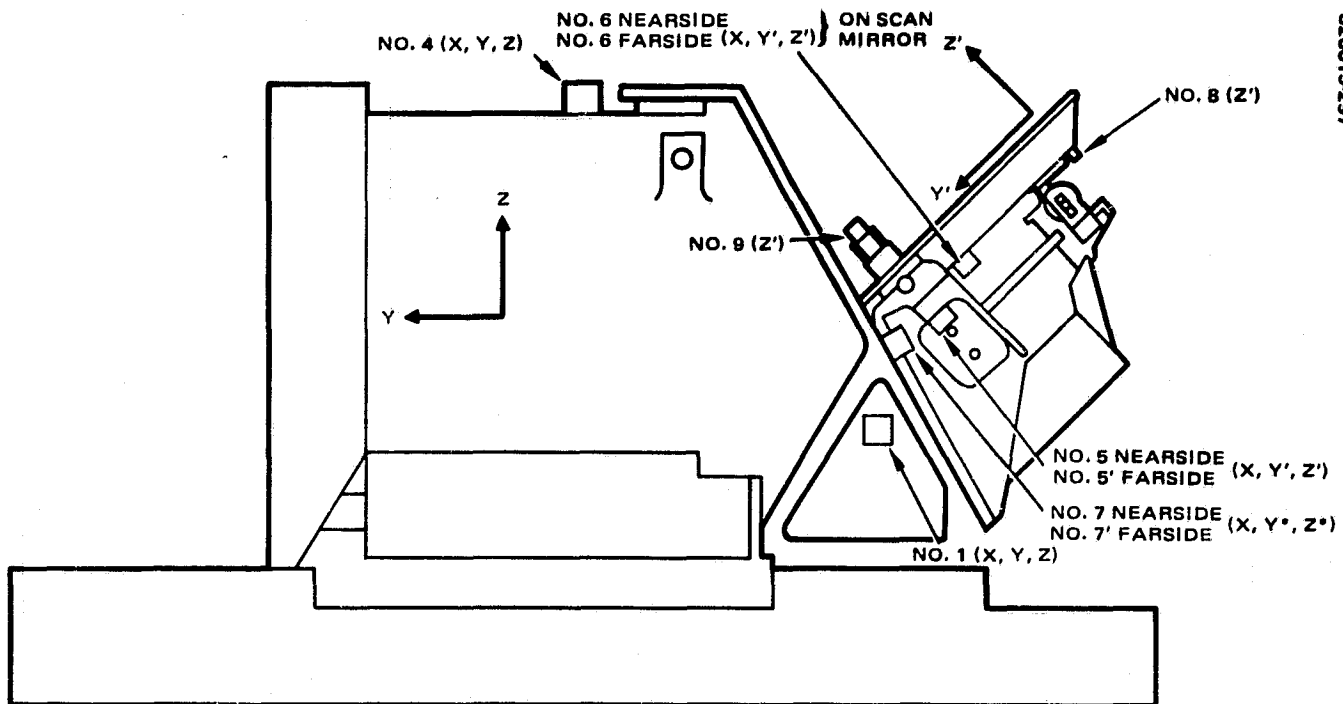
ENGINEERING MODEL SCAN MIRROR ASSEMBLY ACCELEROMETER LOCATIONS
